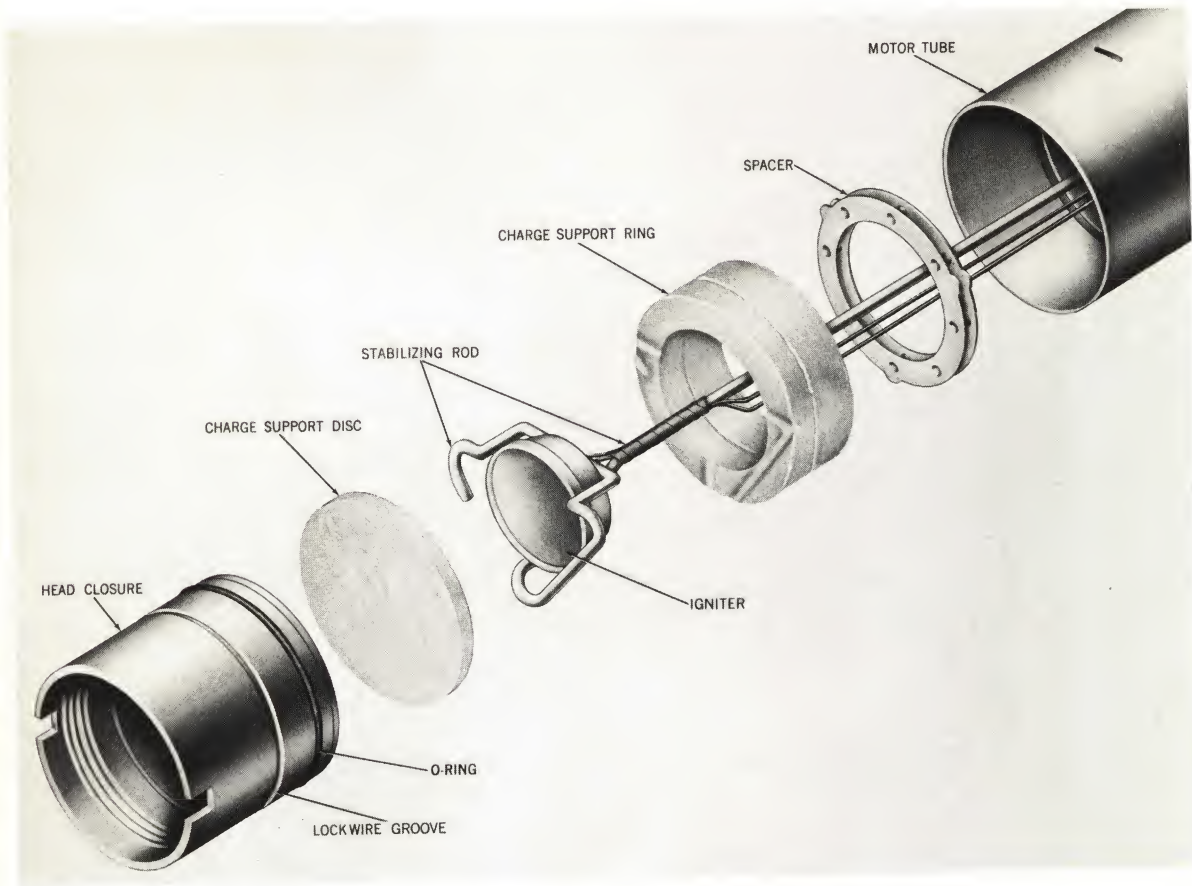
Components in Forward End of 2.75-Inch FFAR Motor, Exploded View.
